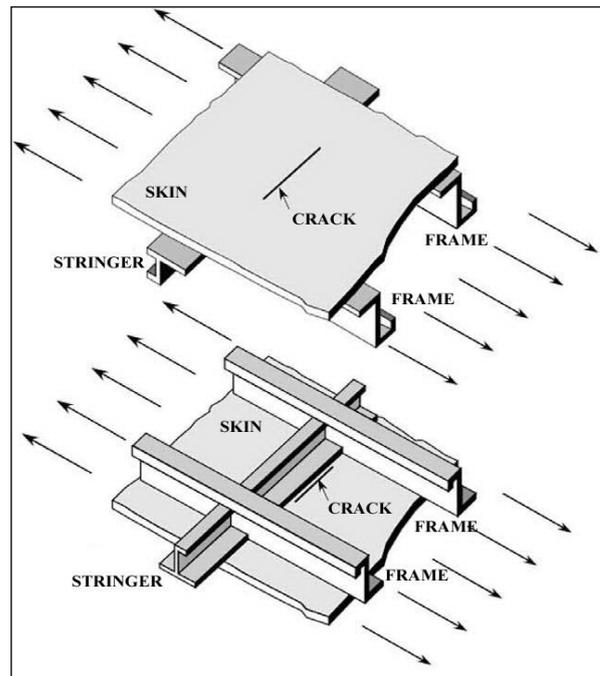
Typical part of an airplane hull construction, with a crack next to the stringer
